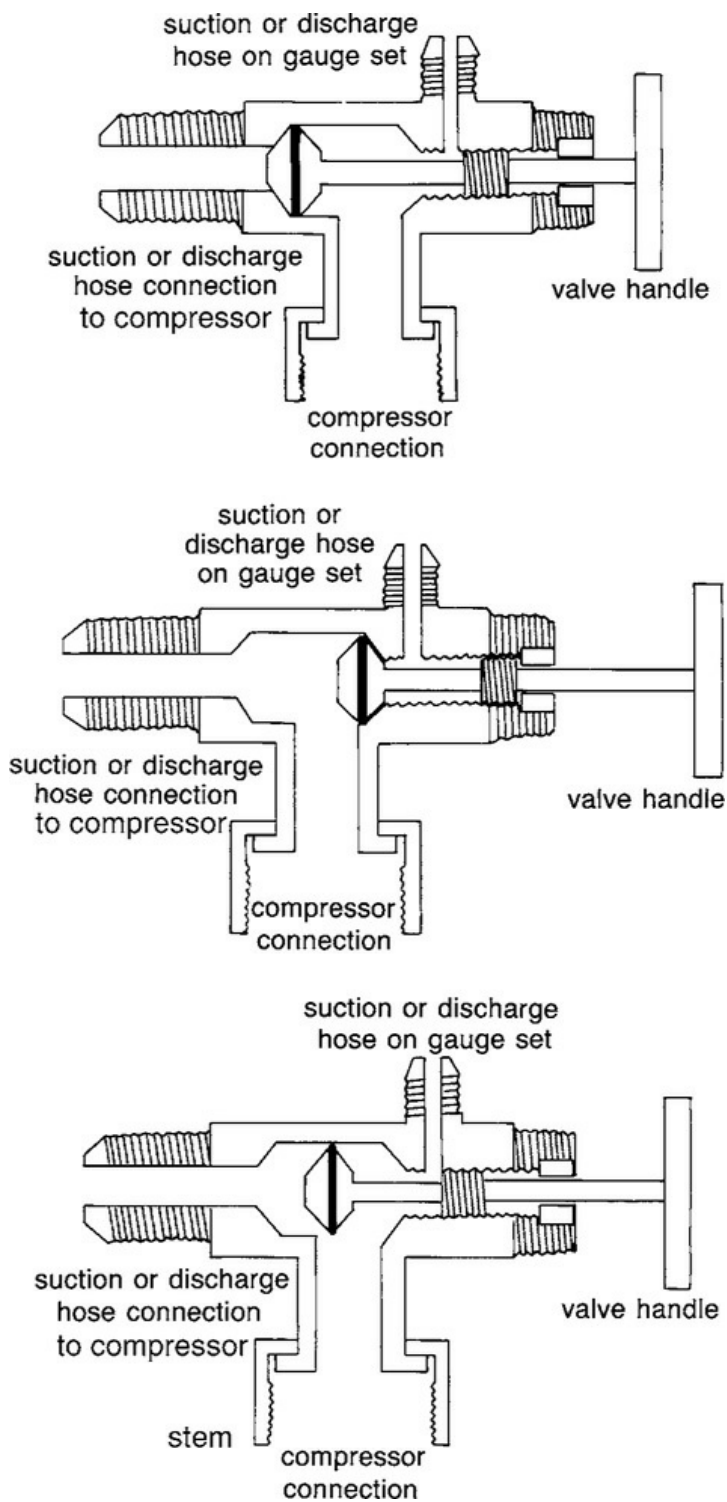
B. Stem-type (Rotolock) valve operation. Top: Valve is
